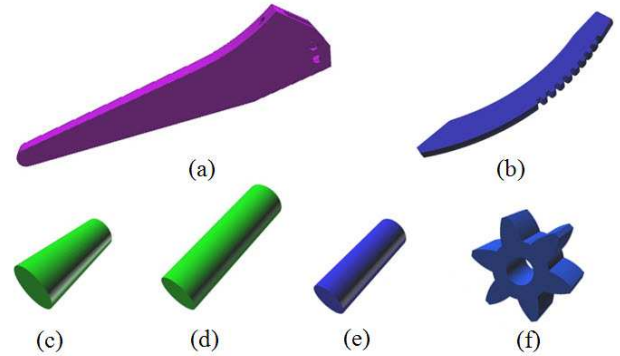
Mechanical stem for MIS : (a) Body, (b) Curved-gear, (c) Wedge-pin, (d) Fixed-pin, (e) Gear-pin, (f) Spur-gear
